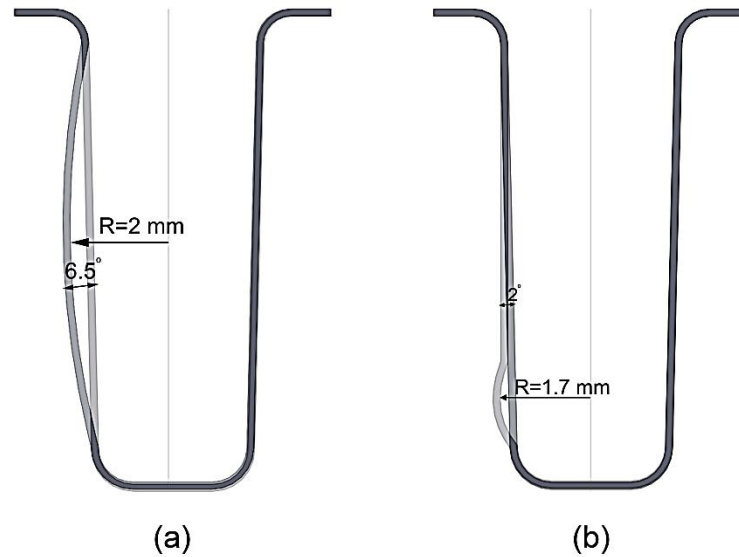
Numerical fin wall imperfections: (a) fin wall bending and (b) fin wall bulging.
